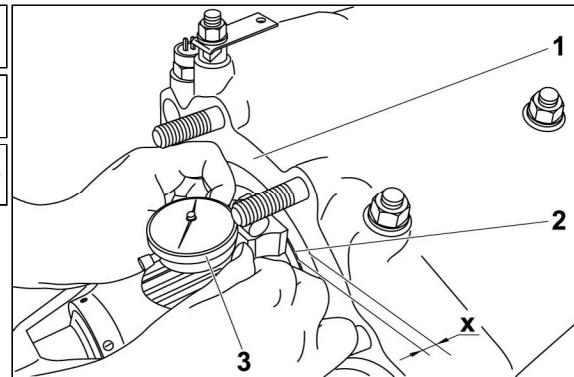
Measurement of the output shaft tapered roller bearings clearance – 1
